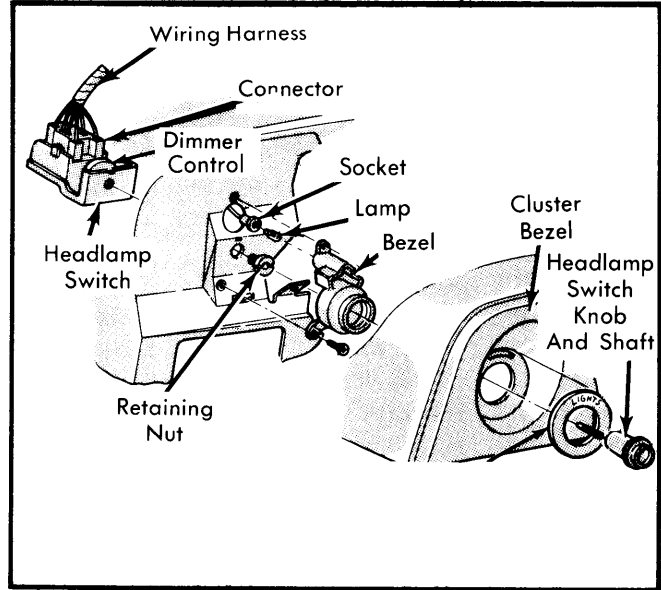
Chrysler Corp. Headlight Switch (Except Motor Homes)
